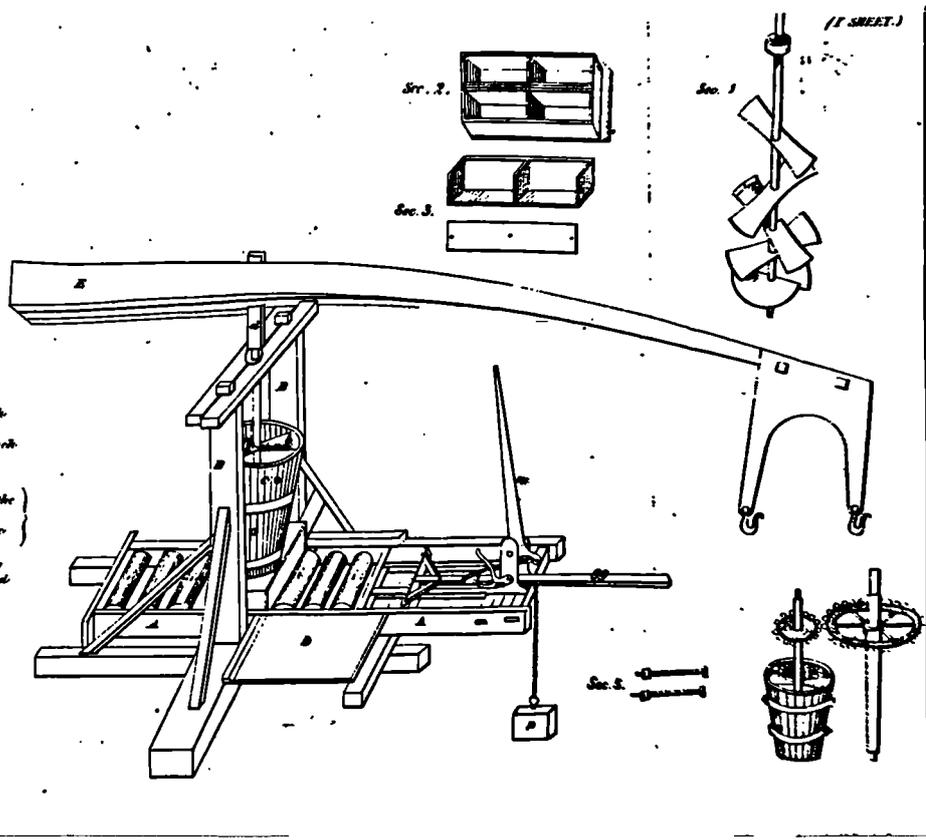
Vertical wheel moulding machine, British Patent No. 6257, 1832, John J. Clark, John Nash and John Longbottom. [Drawing enrolled with patent]
